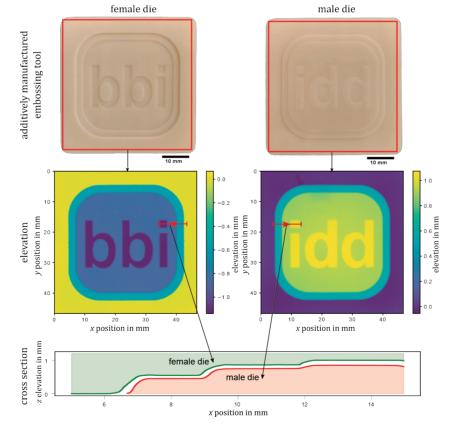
Display of a relief analysis of the additively manufactured embossing tool; 3D scans of the relief surfaces of both dies were realized using an optical profilometer, the figure shows images of the manufactured female and male embossing die, where the area of the scan is highlighted in red; the scanned surface elevation as well as a cross section view of the closed dies are displayed below
